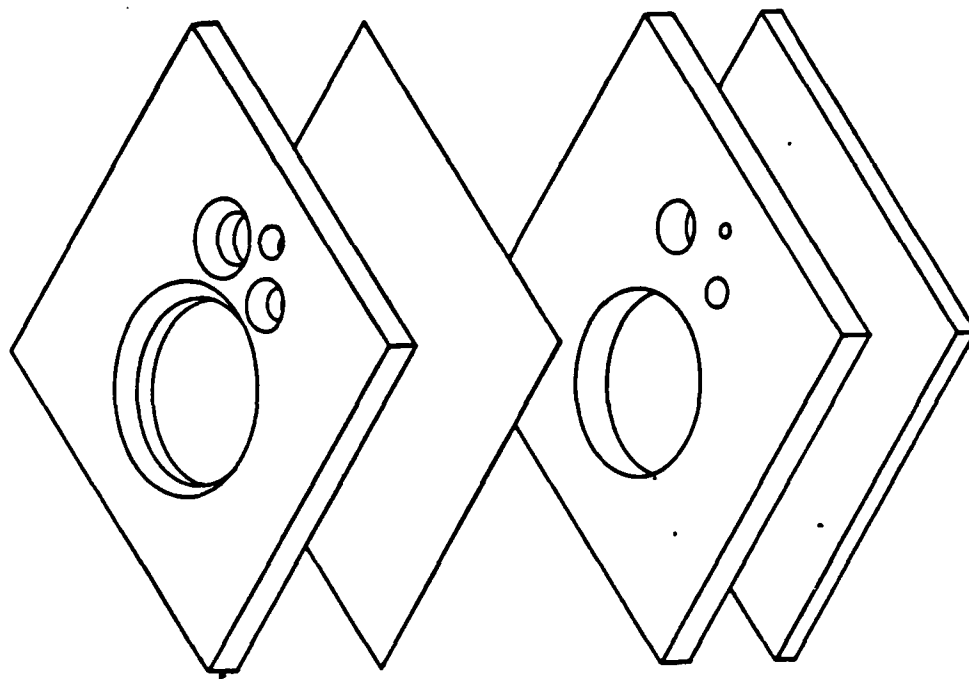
Plan view of the Combat Systems Testing Activity gage and its construction.
